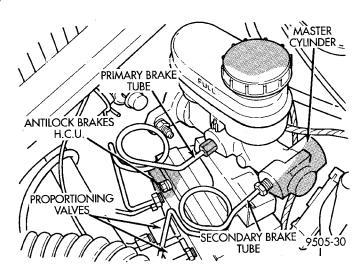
Primary And Secondary Brake Tubes With ABS Brakes
